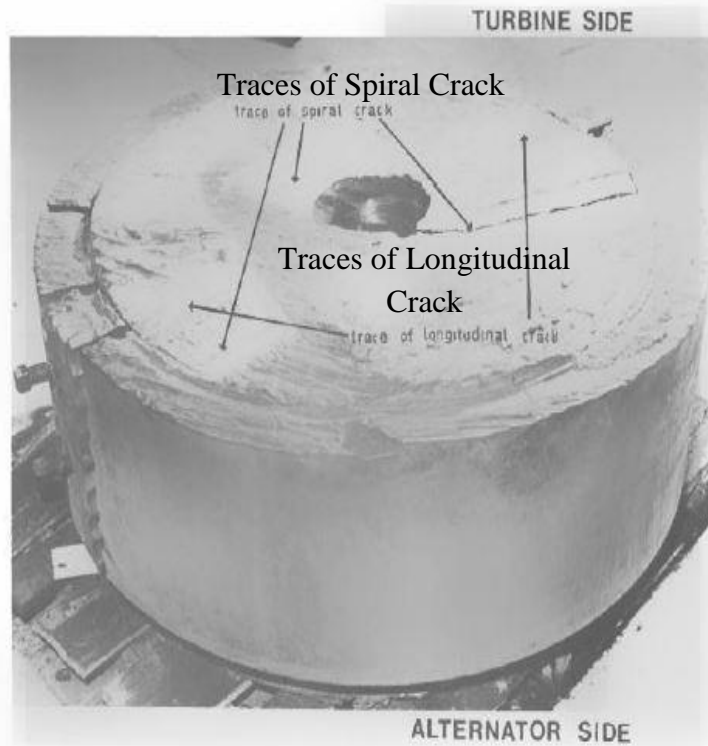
Circumferential Helical Crack on a 1.2m Diameter Hydraulic Turbine Shaft [10].
